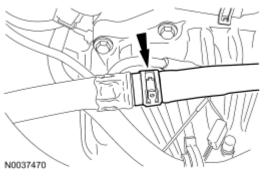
Locating Heater Hose Inline Connector Courtesy of FORD MOTOR CO.
